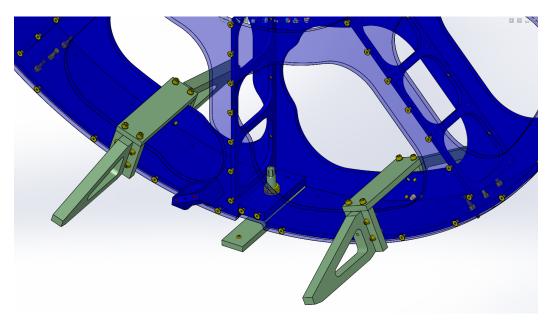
Bottom Support Foot (D1300229) and Jack Screw (D1300228) Assembly.
